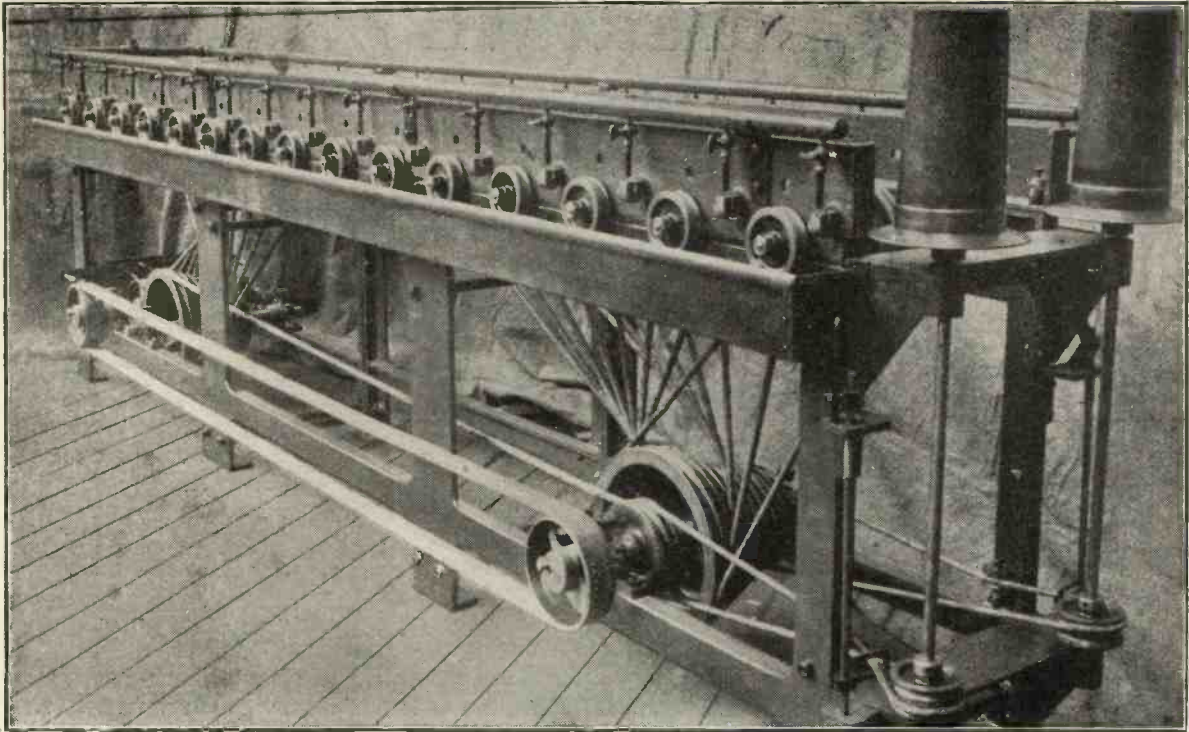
The wire-drawing machine. Small gauge wires are drawn through dies formed of diamonds.
